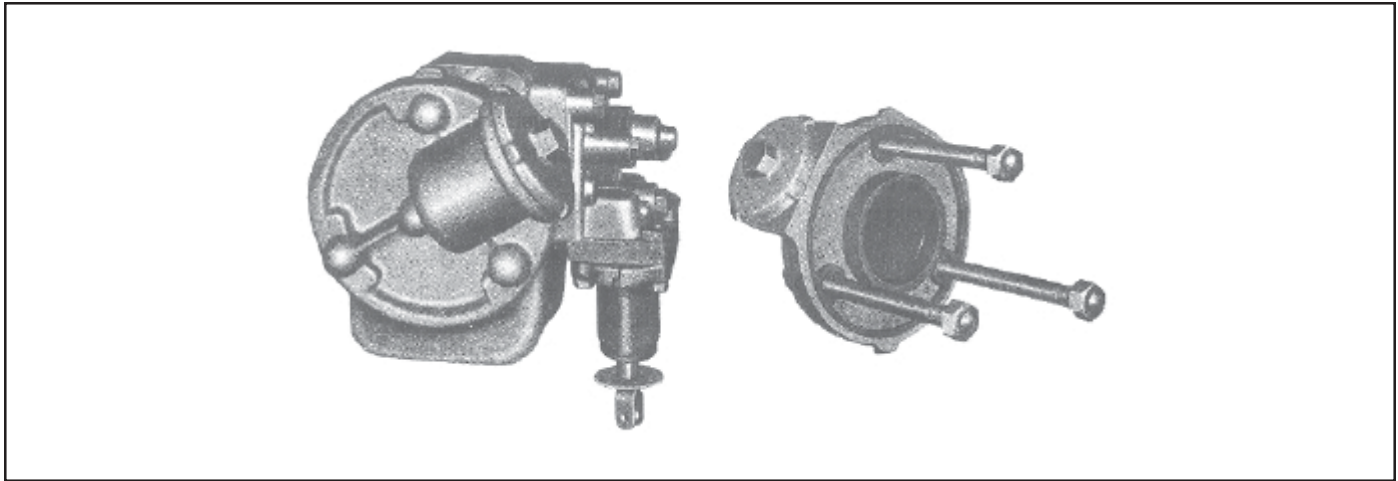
AB Control Valve Service Portion with Shipping Cover and Inside View of the Cover
